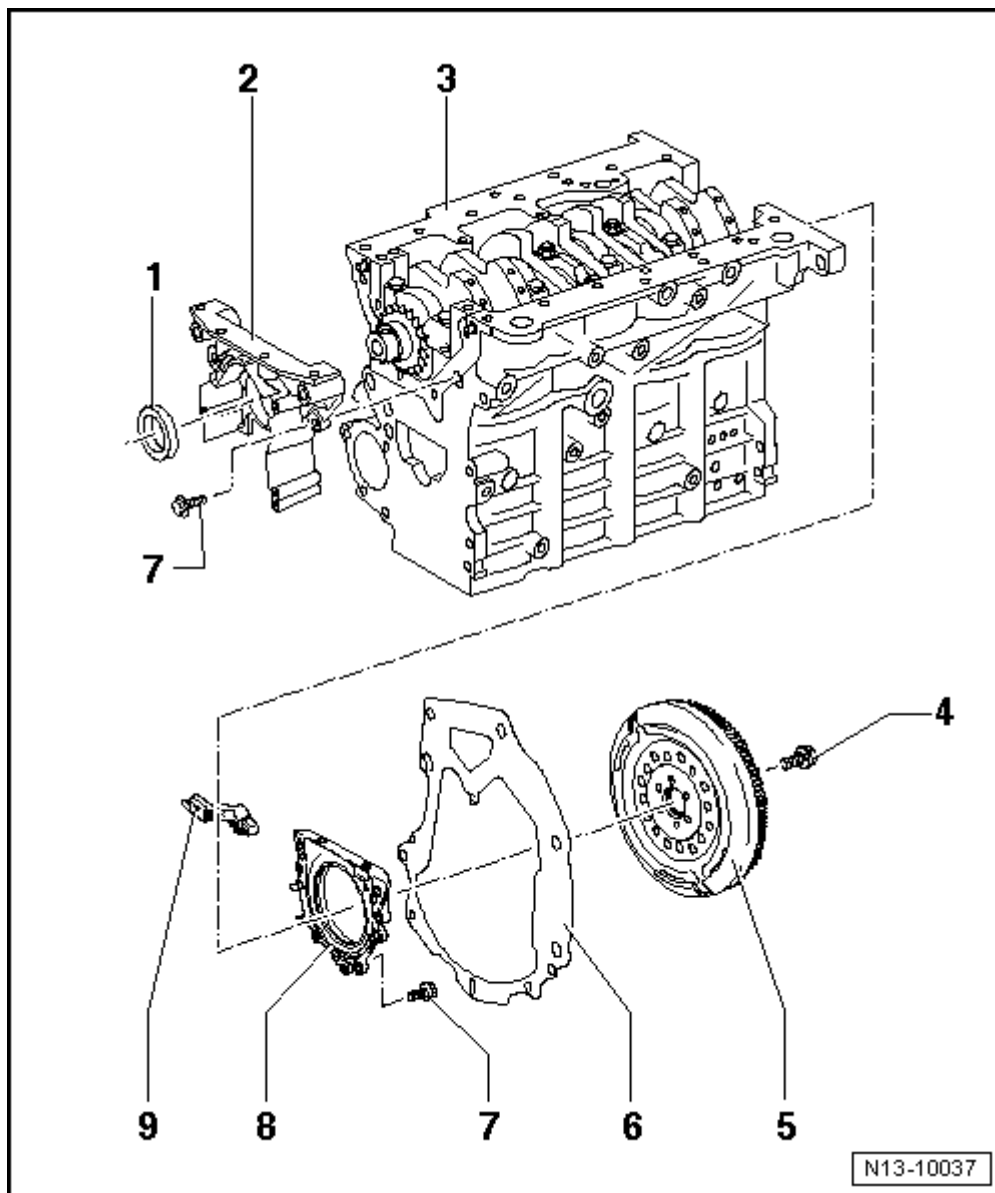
Identifying Sealing Flanges And Flywheel Assembly Overview
